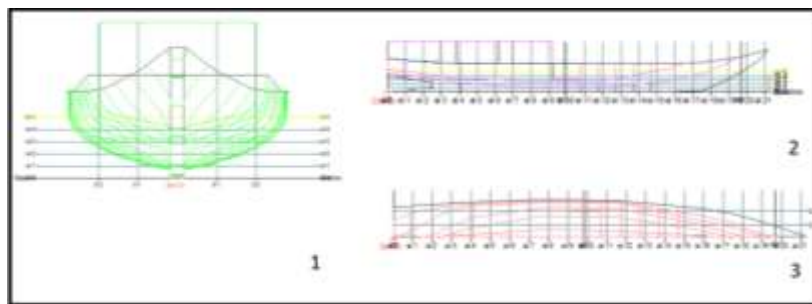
Lines plan ship before redesign front view (1) side view (2) and top view (3)
